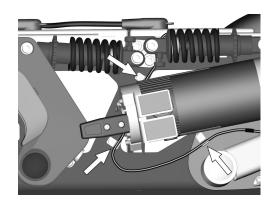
The cable is assembled with three cable brackets on the left and right hand side of the chassis.
